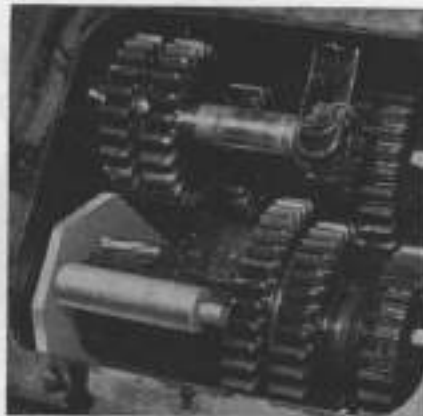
Removing main shaft using OTC tool no. MH671—Models 20, 20K, 22, 22K, 81 and 82.
